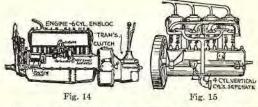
A six-cylinder "unit power plant." Transmission and clutch case join the engine. Cylinders are east together, or "in block."
